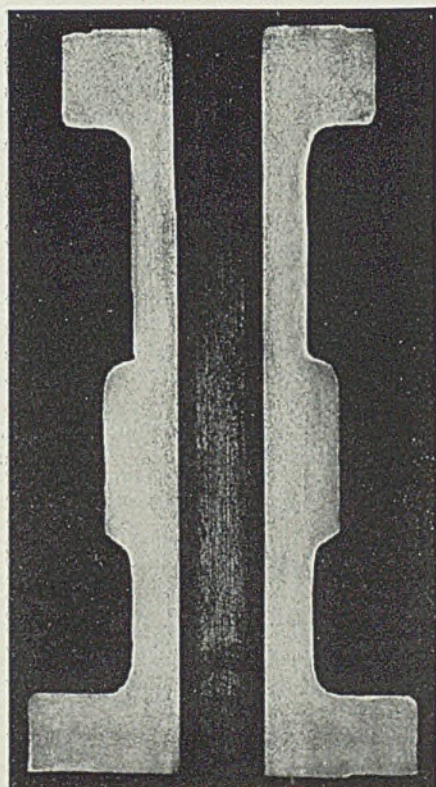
(left)—Cross section of typical gear showing comparatively "dense" macrostructure. Fig. 2 (right)—Similar cross section showing gear with more "open" macrostructure
